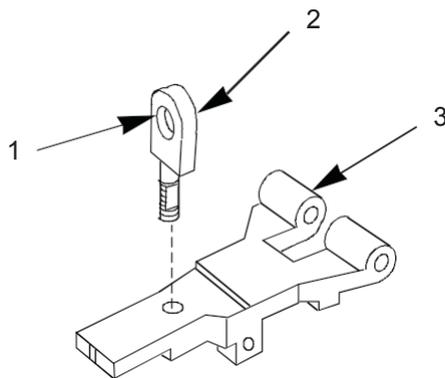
Peep Sight, Sight Leaf, Peep Hole.
